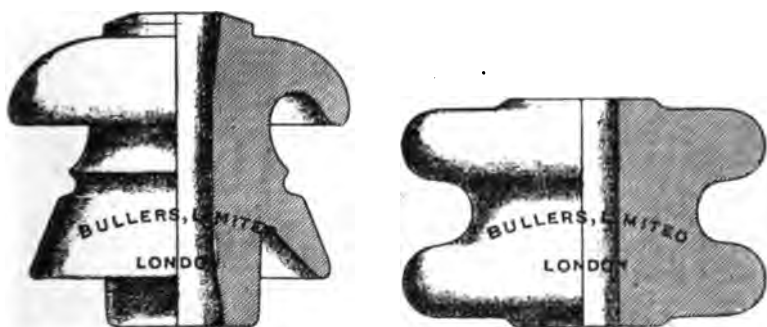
Forms of Shackle Insulators used for terminating Engine-road Signal Wires.
